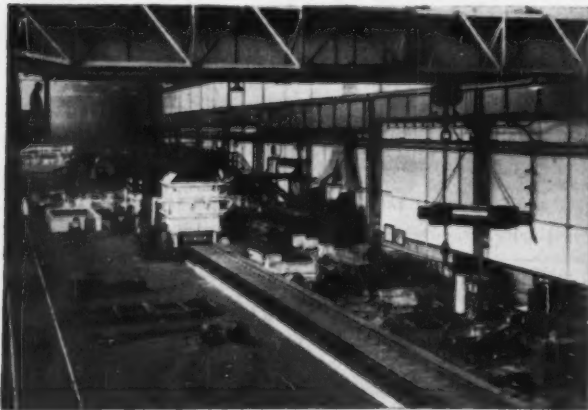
The four-high hot Steckel Mill installed at Shepcote Lane Rolling Mills Limited.
